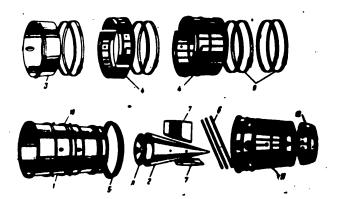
Centrifugal Compressor Engine Exhaust Cone
